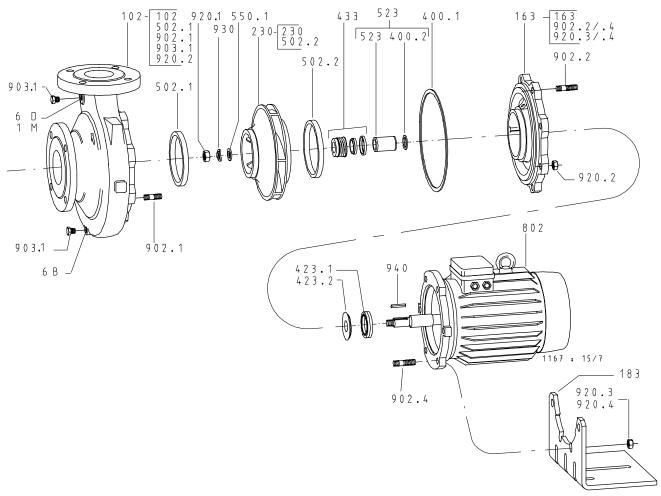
Standardised mechanical seal and bolted discharge cover Table 26: List of components
